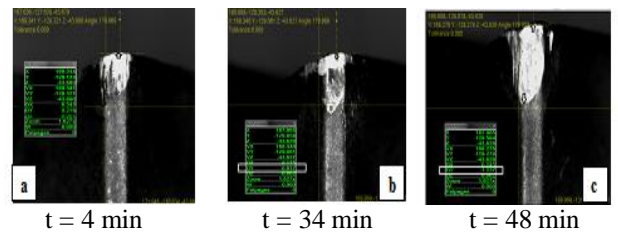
Details of VB wear on the tool face after machining ( $V_c = 760$  m/min,  $f = 0.08$  mm / rev and  $a_p = 0.5$  mm)
